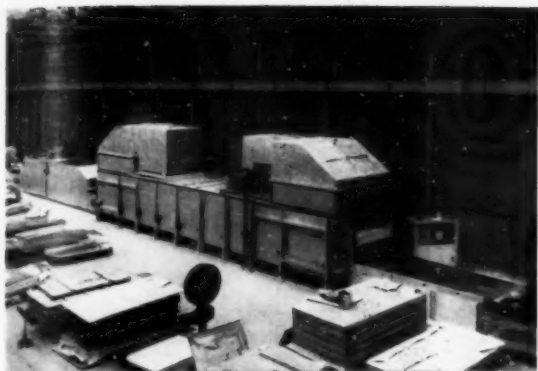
A continuous "flash" annealing furnace for aluminium sheets or circles. Designed and built by Stordy Engineering, Ltd., it will handle single sheets up to 5 ft. wide and circles down to 5 in. dia. at 1 ton/hour.
